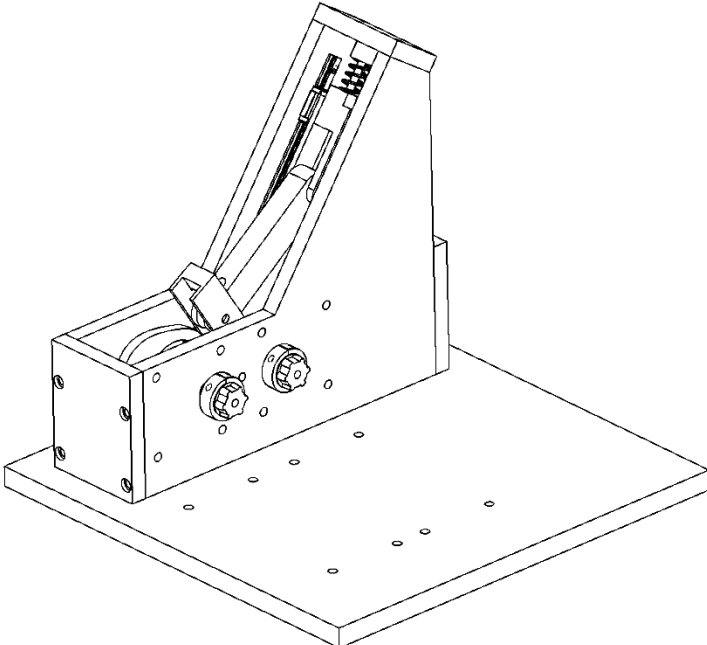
Direct-Drive Cam-Servo Test Machine, No Motor
